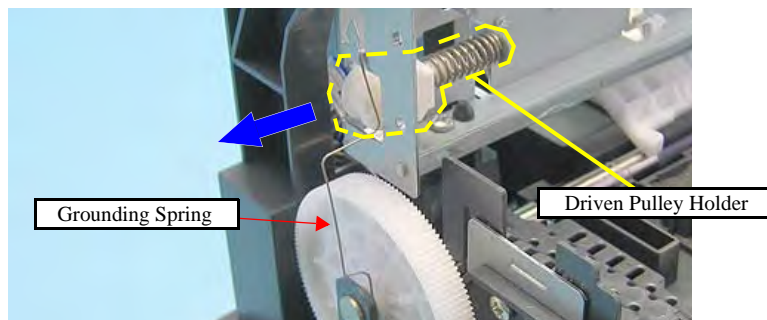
Removing Grounding Spring and Driven Pulley Holder
